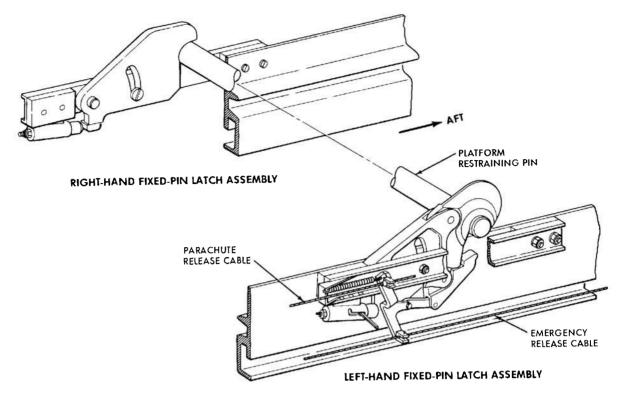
FIXED-PIN LATCH ASSEMBLIES
